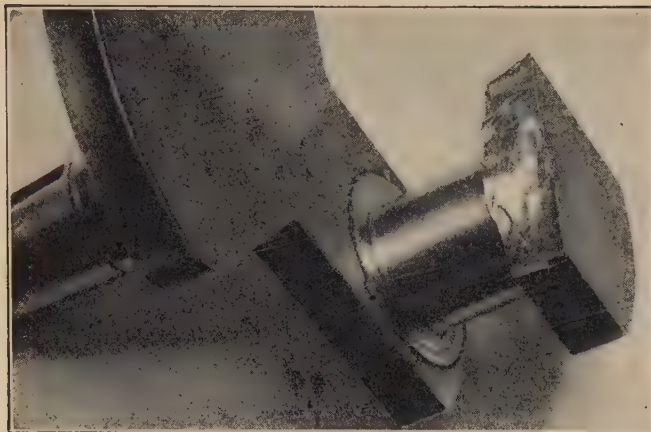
Fatigue break of a motorcycle crankshaft starting at corner which had too small a radius.
